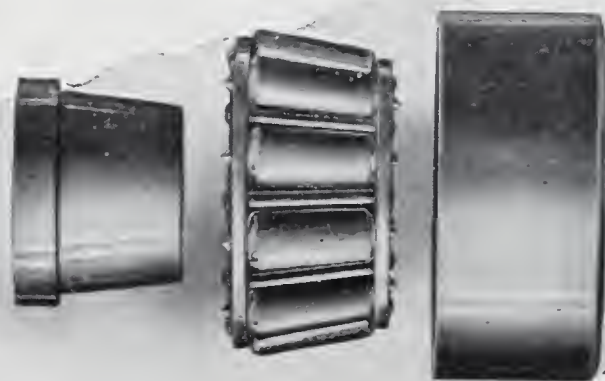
TAPERED ROLLER JOURNAL BEARING.
